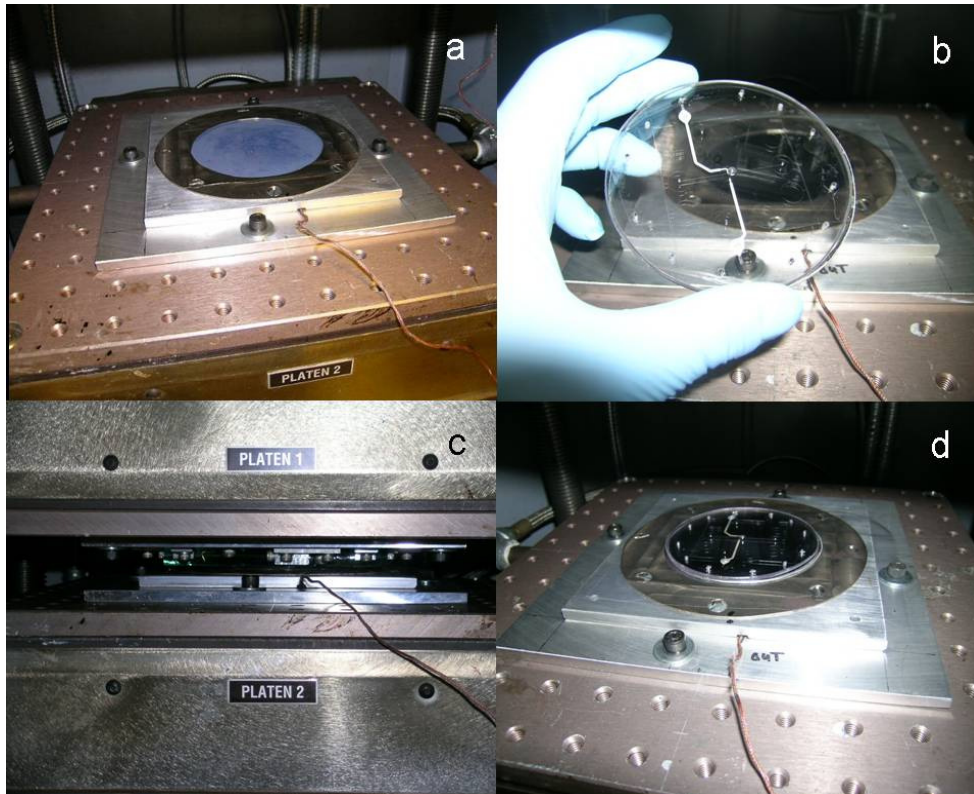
Device bonding in pictures. (a) Bottom embossing jig loaded with blank Si wafer covered with PTFE release film, (b) Clean assembled device ready for bonding, (c) Device being bonded in hot press, and (d) Newly bonded device ready for removal from hot press.
